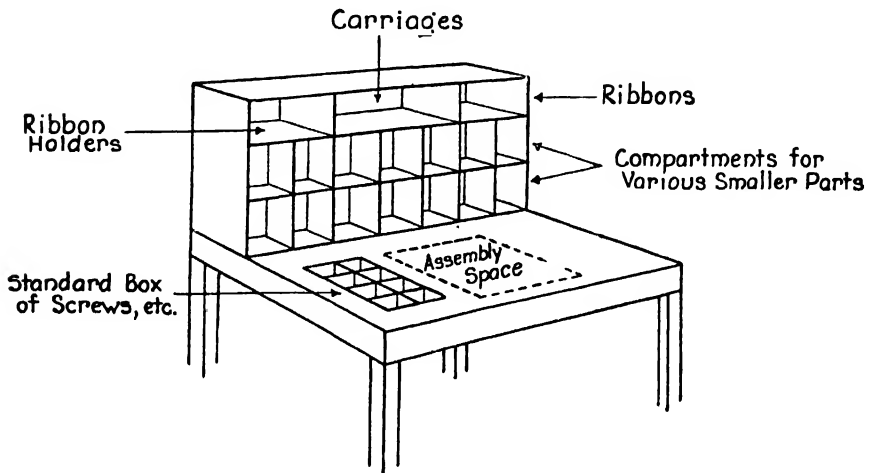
Standardized Assembly Bench, Corona Typewriter Co., Groton, N. Y.
